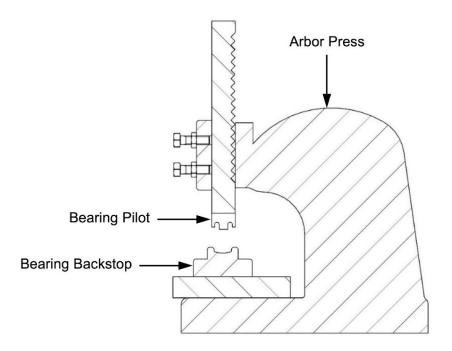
Cross-section View of Arbor Press Configuration for Bearing Installation
